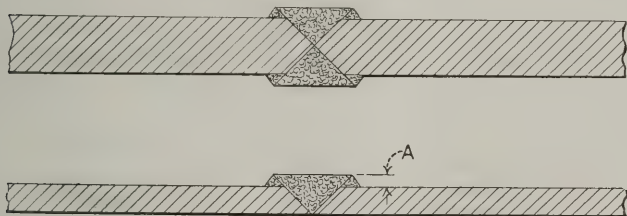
Cross Sections of Standard Welds Showing Single and Double Reinforcement
